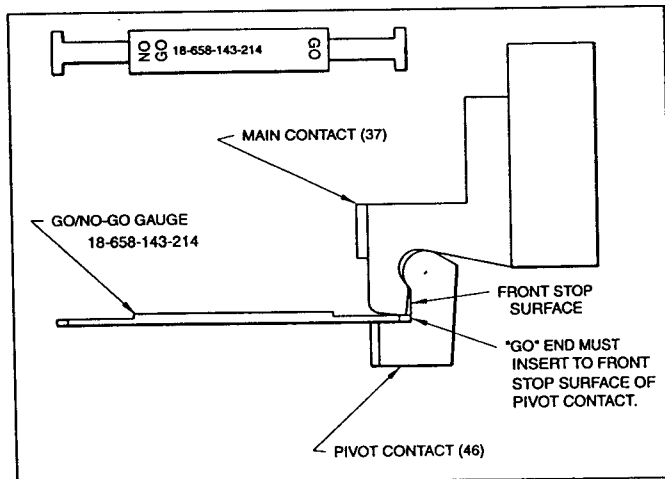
Use of the GO/NO-GO Gauge to Check Main Contact Make (Compression)
